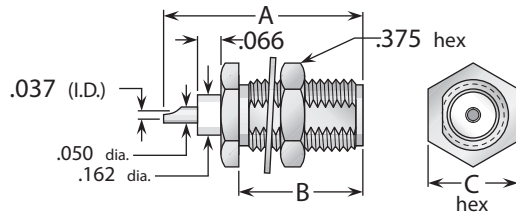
(Rear mount, solder pot contact, no mounting gasket)
